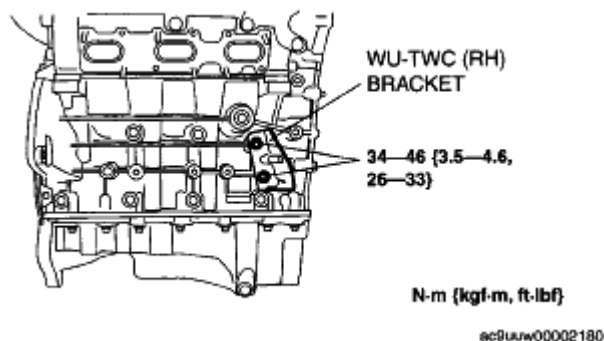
Identifying WU-TWC (RH) Bracket With Torque Specifications
